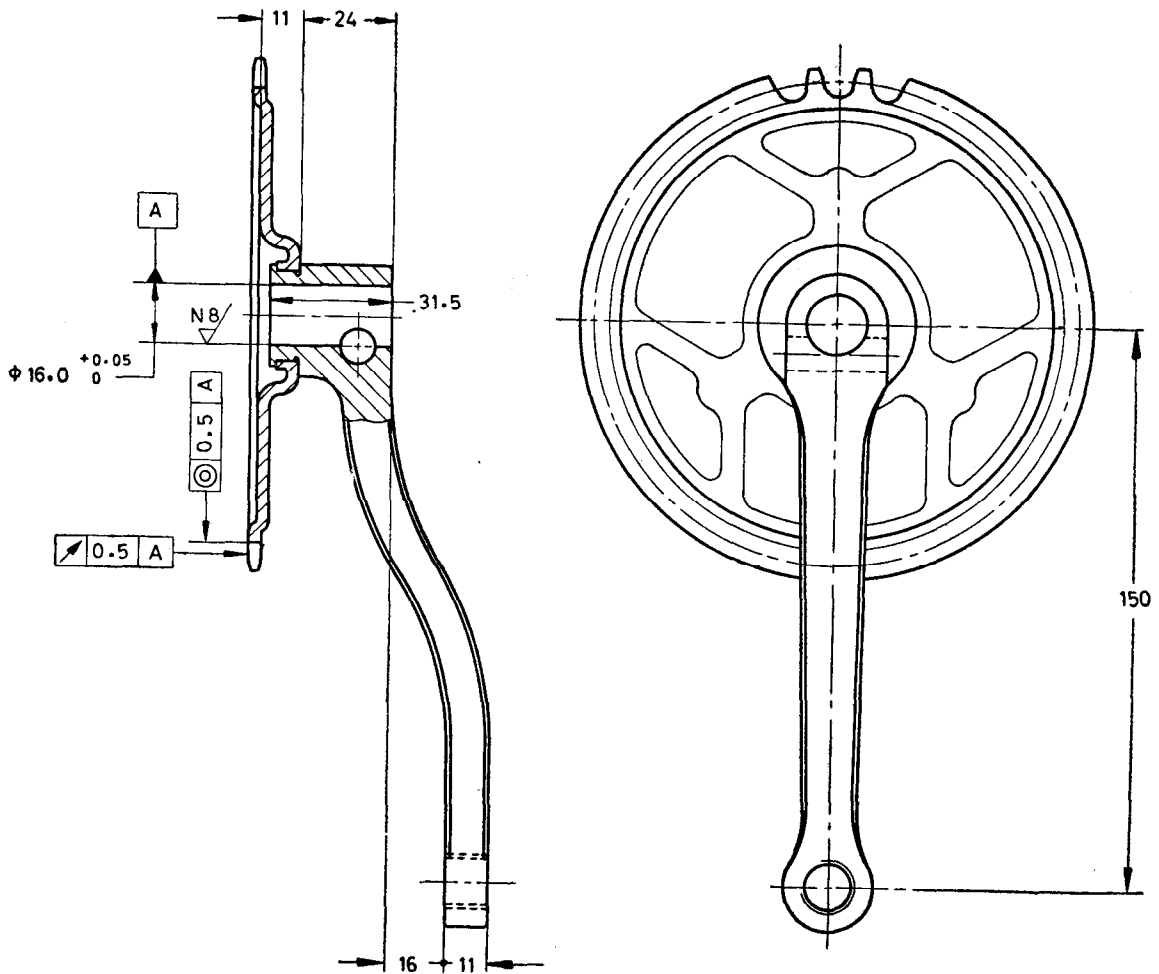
DIMENSIONS FOR CHAIN WHEEL
